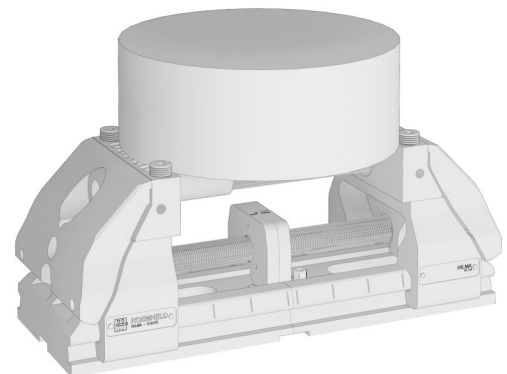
Clamping jaw with round clamping bolt and clamped workpiece
